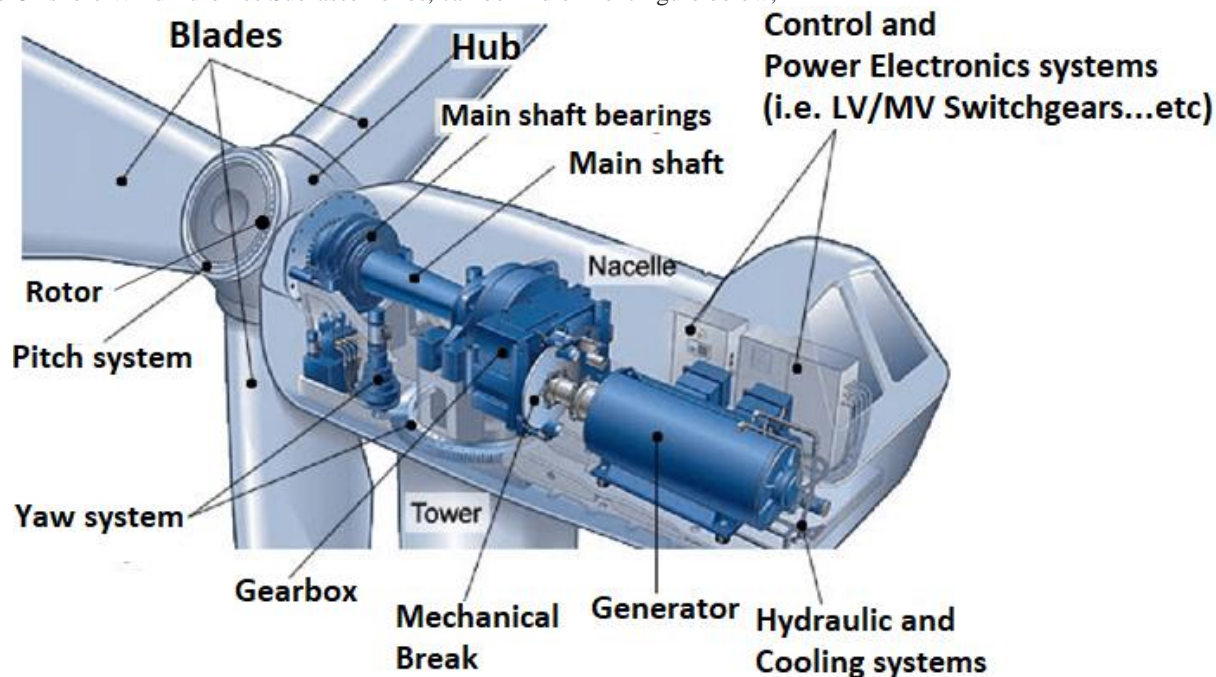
Wind Turbine Sub-Assemblies (Courtesy of [7])
